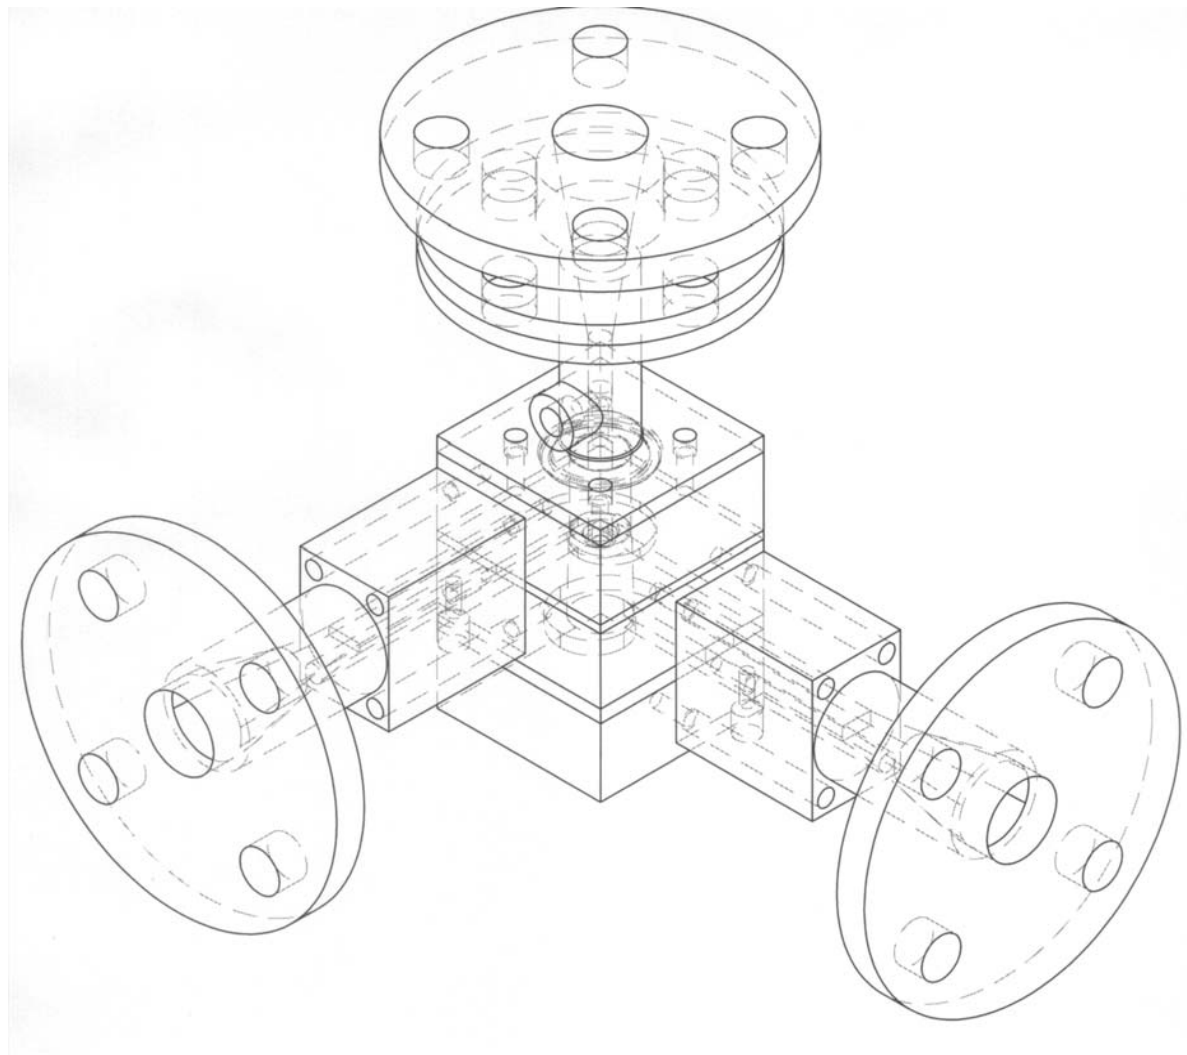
General Assembly drawing of 1x I-SEP test unit
